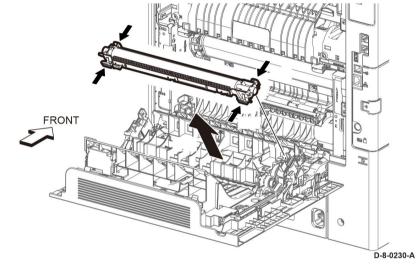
Remove the Second Bias Transfer Roller Assembly (C505/C605/C605_Tall)
